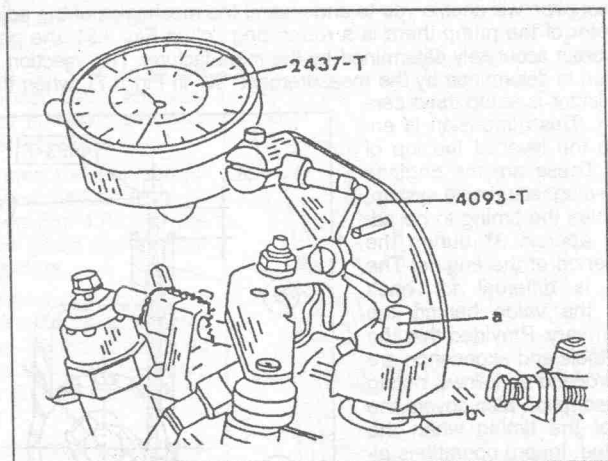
The special tools fitted to the injection pump. Note where the pin "a" and the tube "b" are located.
